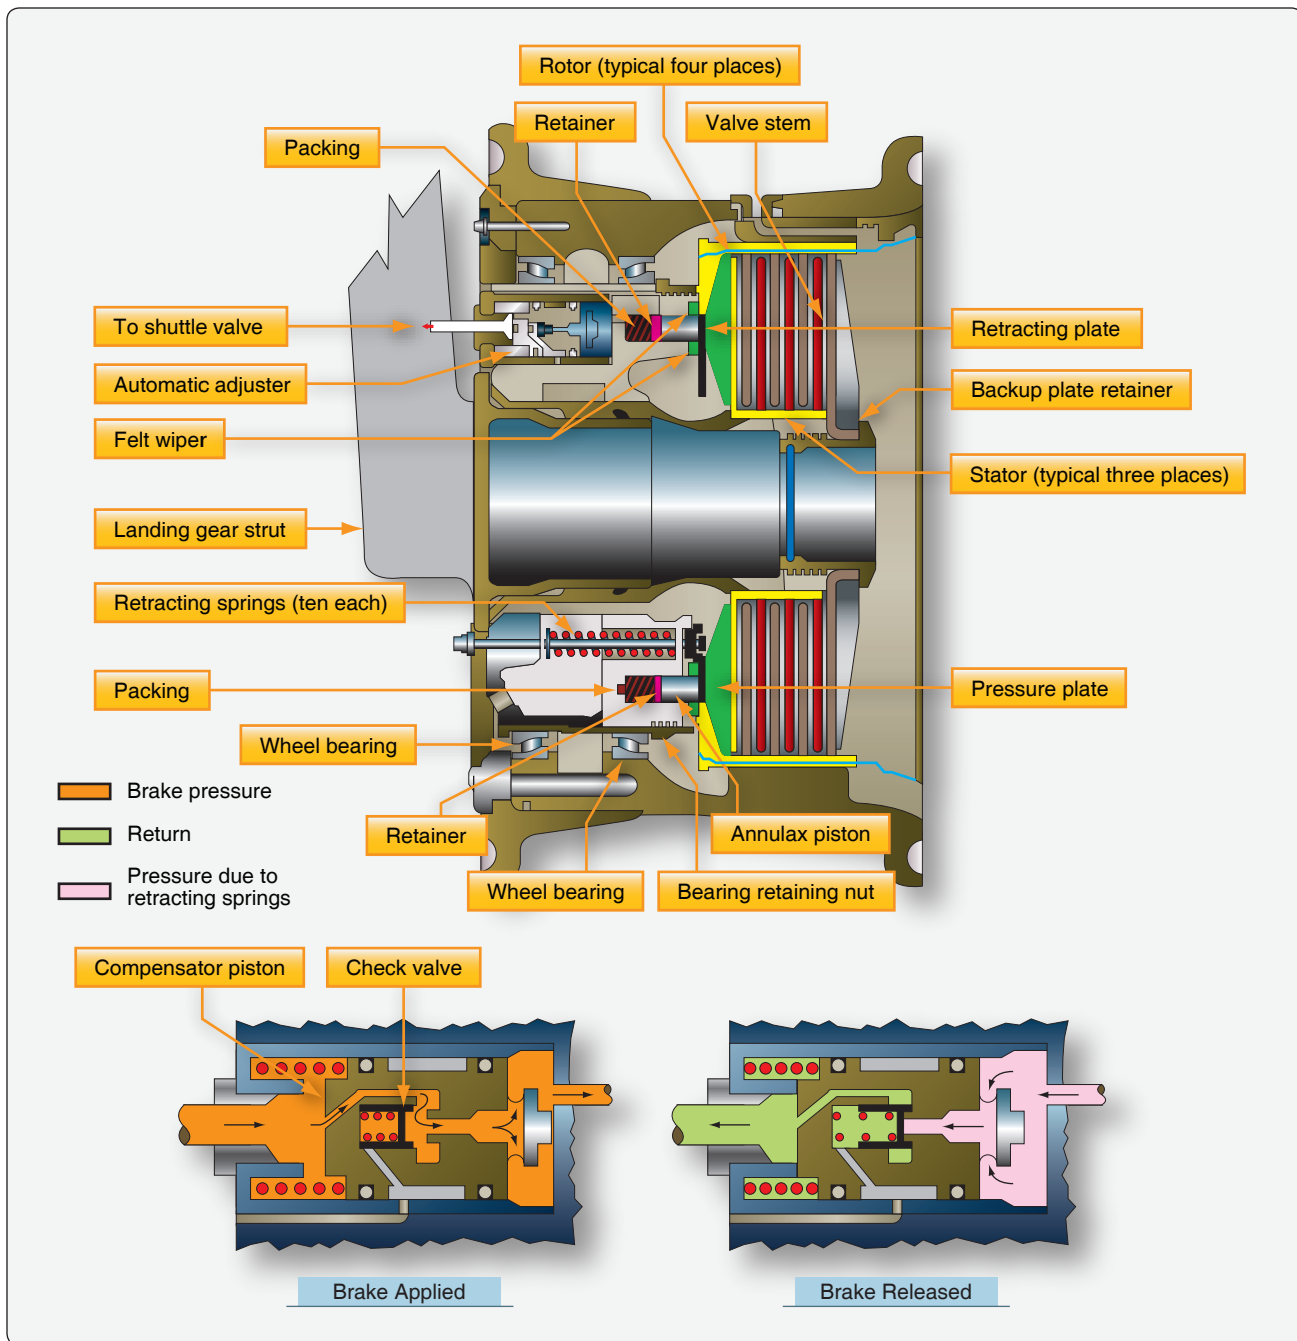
A multiple-disc brake with details of the automatic adjuster.
